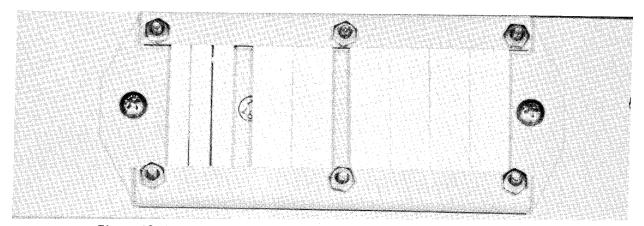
Short Beam Shear and Flexure Specimen Holding Fixture
